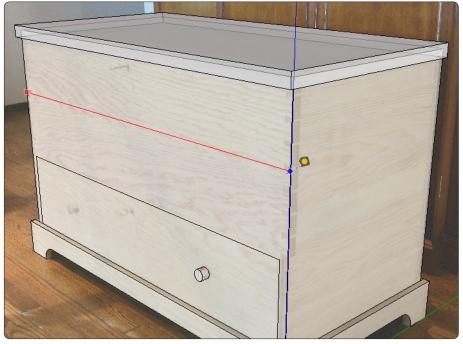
Use the Tape Measure Tool to check the length of a piece whose actual size you know. In this case, it's the front piece of the blanket chest.
